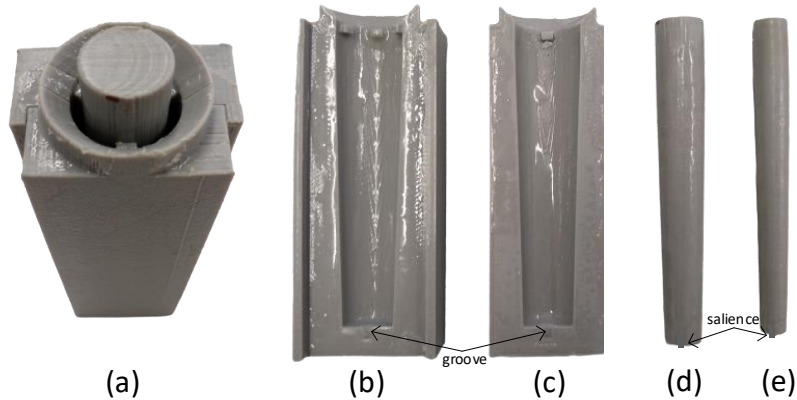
PLA printed parts. (a) Mould assembly with the largest core; (b) and (c) Mould parts; (d) Largest core; (e) Smaller core.
